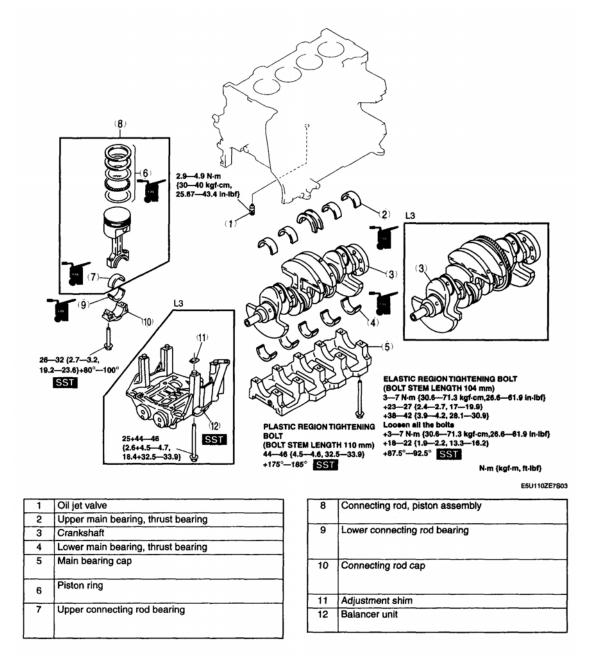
Exploded View Of Cylinder Block (I) Assembly & Torque Specification Courtesy of MAZDA MOTORS CORP.
